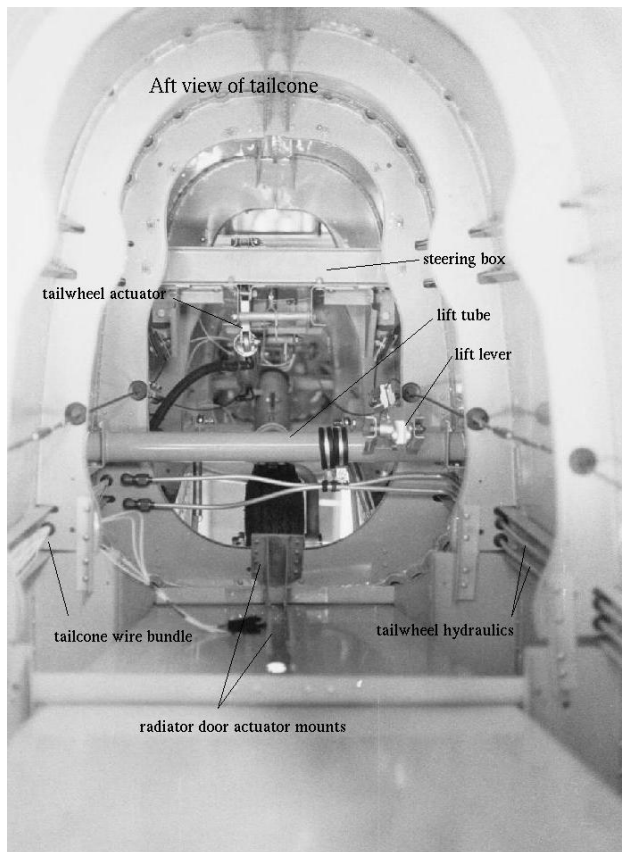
It's getting crowded back in the tailcone. Crawling back here to install parts is not a fun job, especially if the canopy is on. The radiator door actuator mount is shown in the lower part of the picture.
